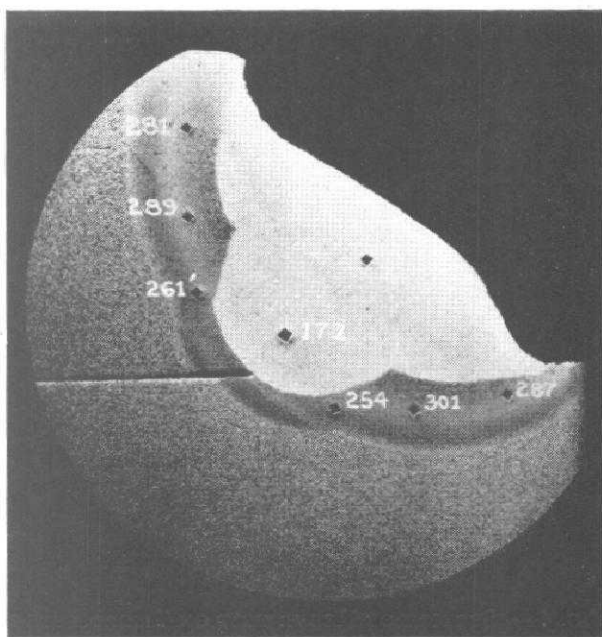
SECTION OF REEVE TEST ON FORTIWELD STEEL SHOWING ABSENCE OF WELD-CRACKING
